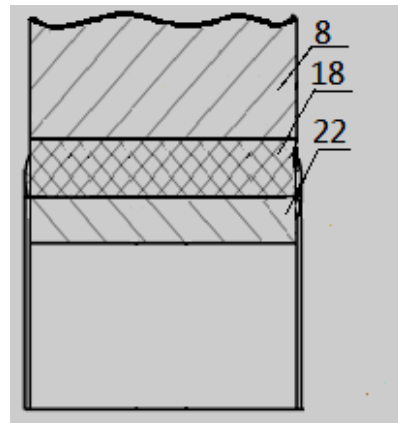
Structure of damping component of the new type of cycloidal drives: 8 cycloidal gear, 18 flexible rubber ring (I), 22 turning arm bearing.
